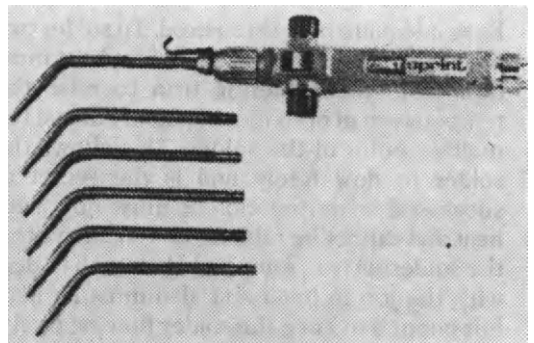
(b) Comet Sprint welding torch (NZIG).
